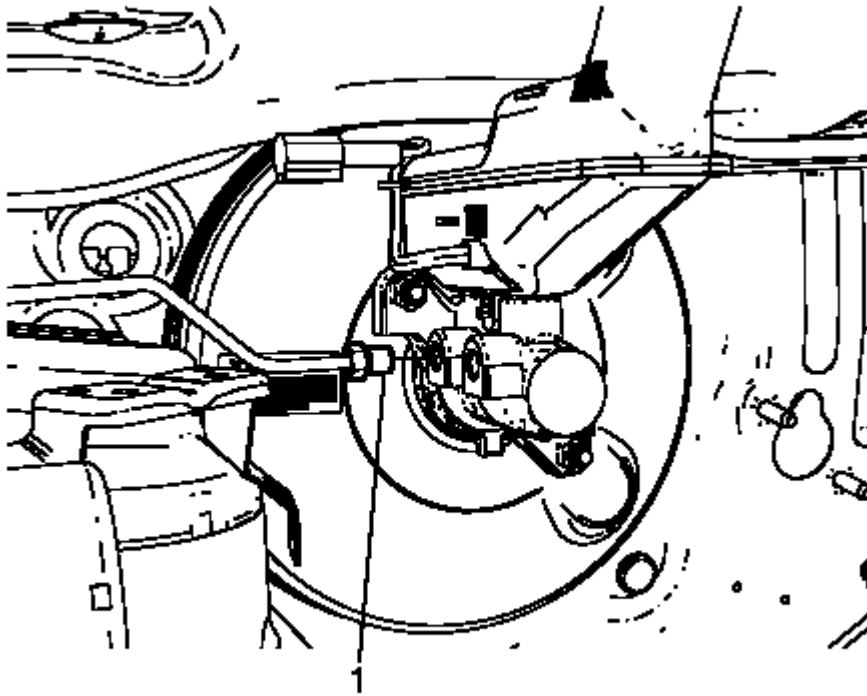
Master Cylinder Primary Brake Pipe Fitting
